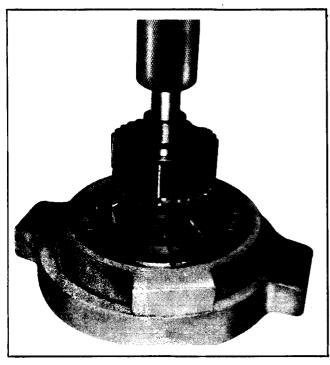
C-13 Removing 3rd and 4th Synchronizer and 3rd Speed Gear
